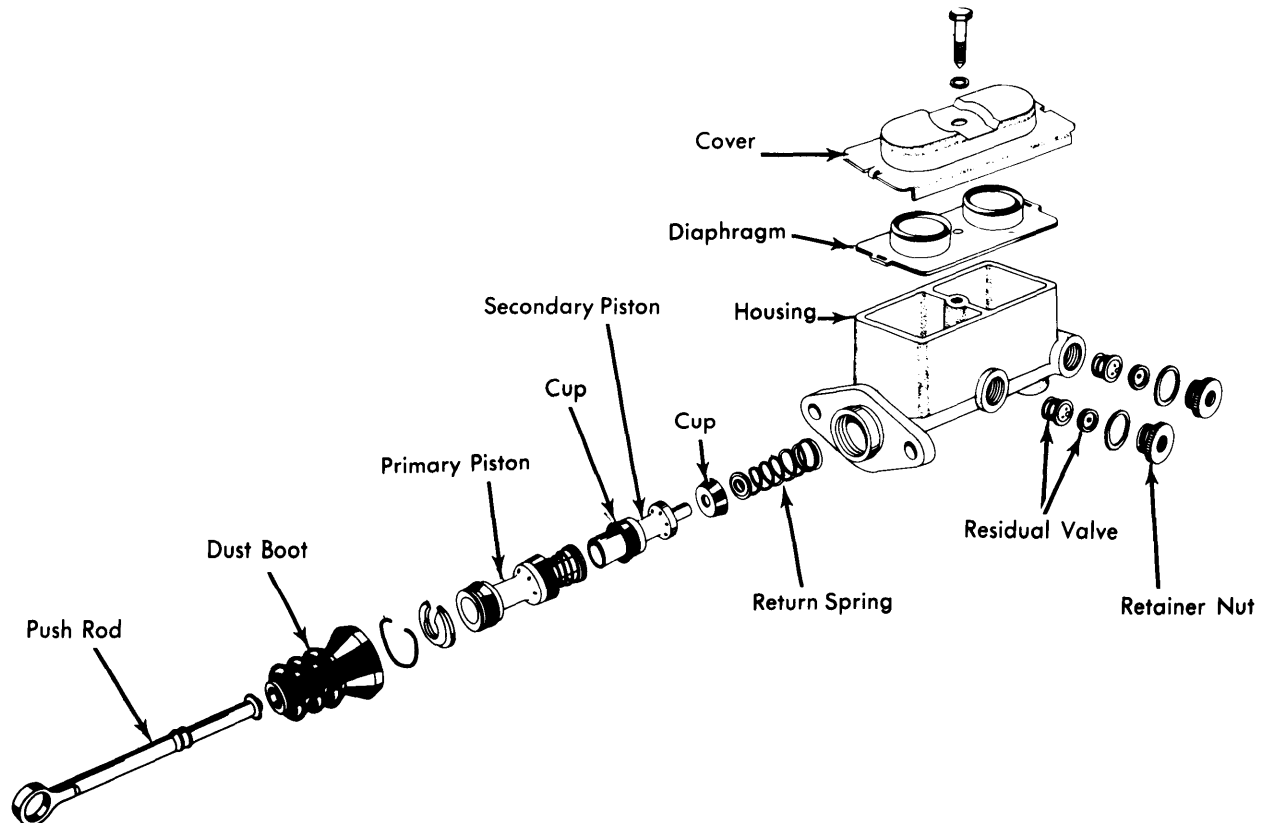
Exploded View of Master Cylinder Assembly (Typical)
